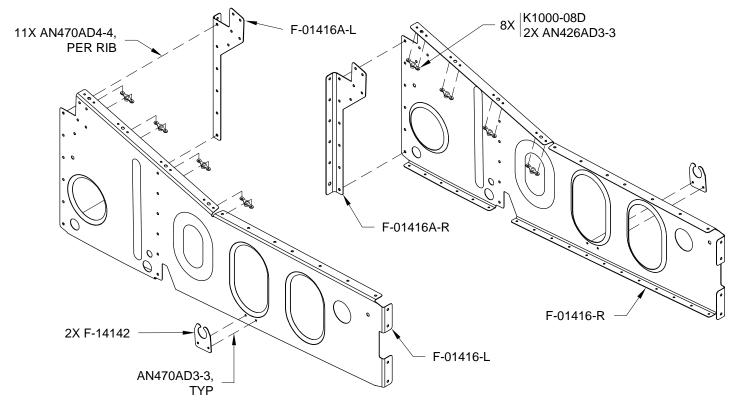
RIVET NUTPLATES & DOUBLERS TO RIBS
